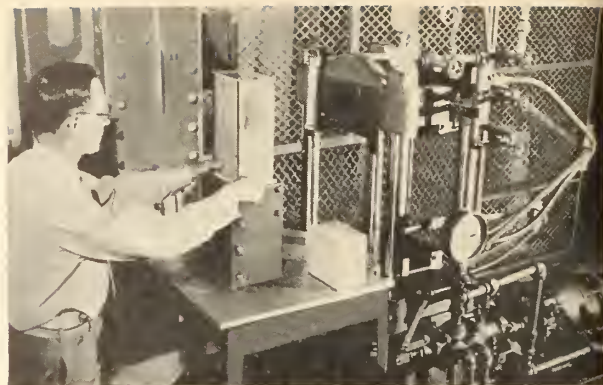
The heated material is here being charged to the mold box. Next the operator will insert the moving die and place the assembled mold between the platens of the Elmes press at right.
